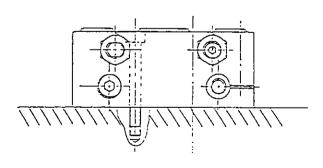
Fixing from upper (by hexagon socket head cap screw)
